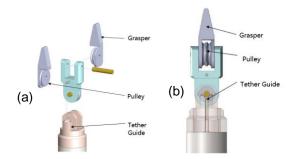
(a) and (b) depicts a design of the tool with an exploded and an assembled view of the tool tip showing grasper, pulley, and tether guide.
